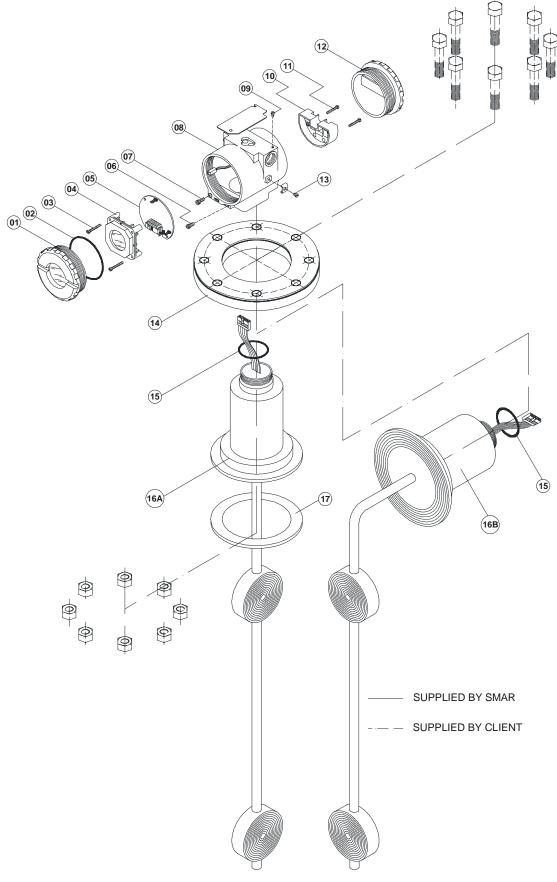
DT301 - Exploded View (Industrial Model)
